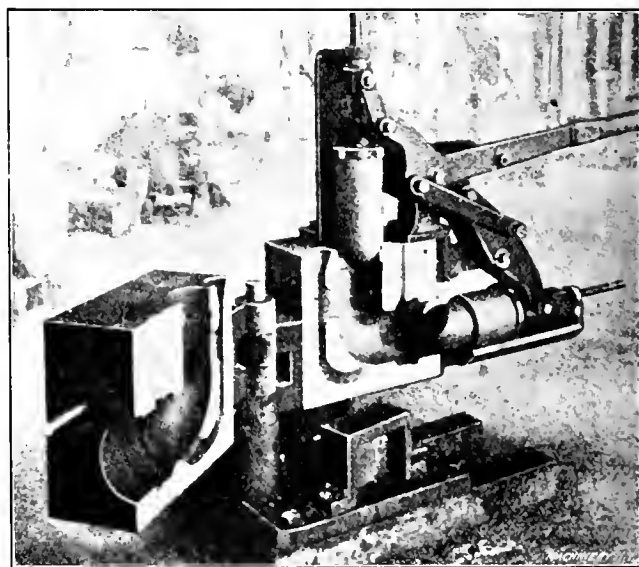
Casting Removed from Mold; Cores not yet in Position for Next Casting
